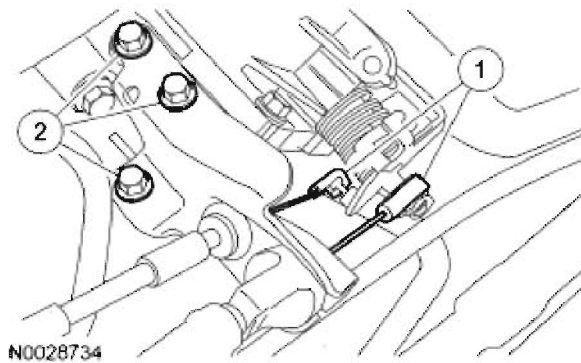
Locating Accelerator Control Cable & Bracket
